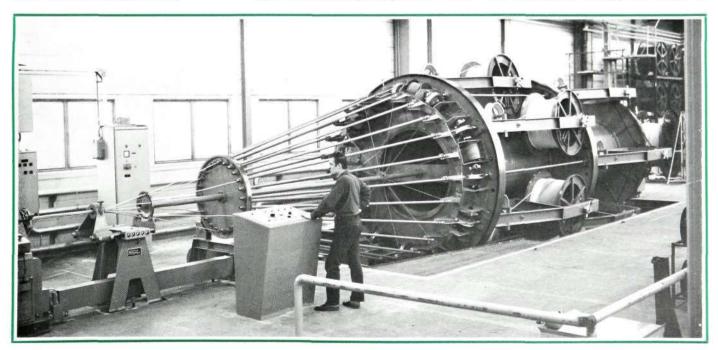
Stranding machine for laying up a maximum of 12 coaxial pairs in one operation. The picture shows the machine during assembly
